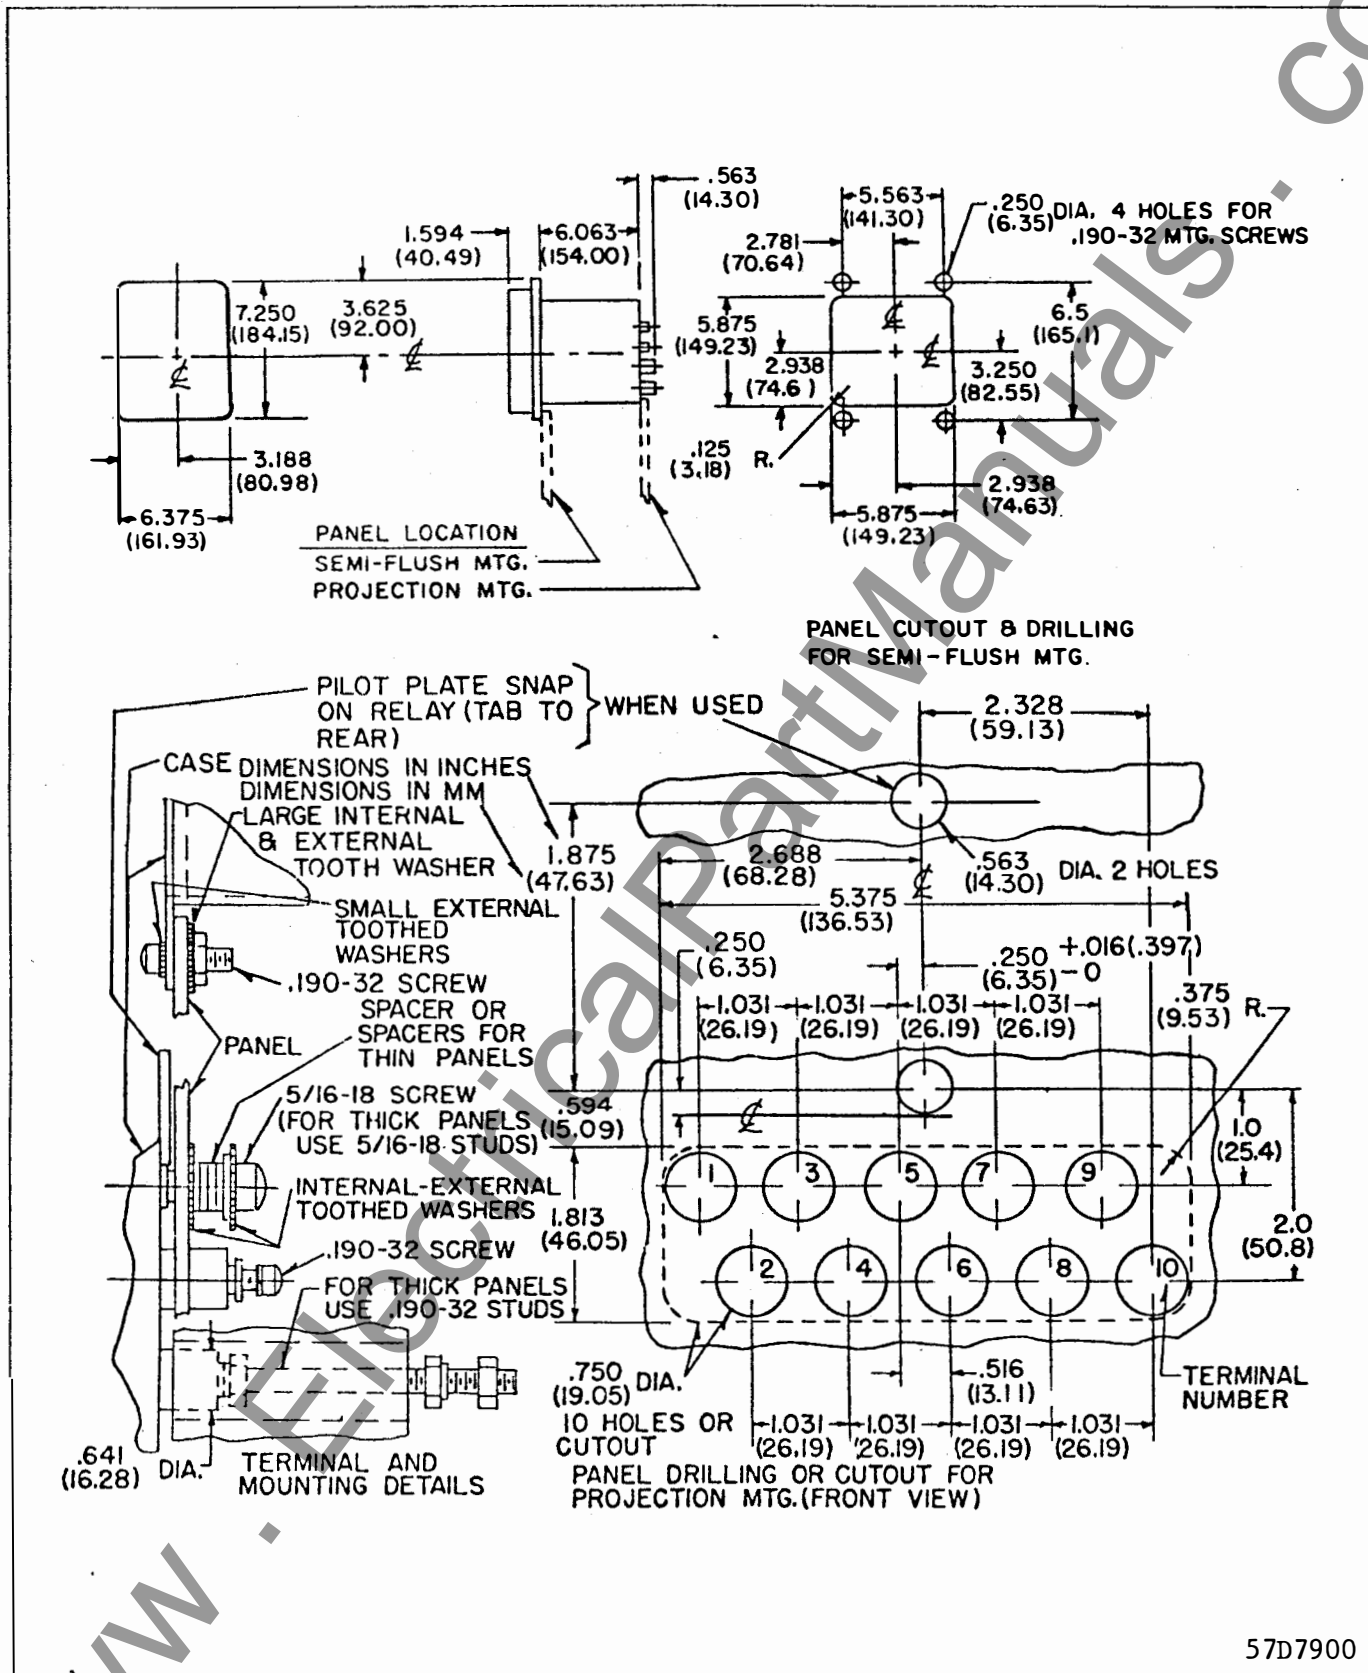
Outline and Drilling Plan for the Type FT11 Case
